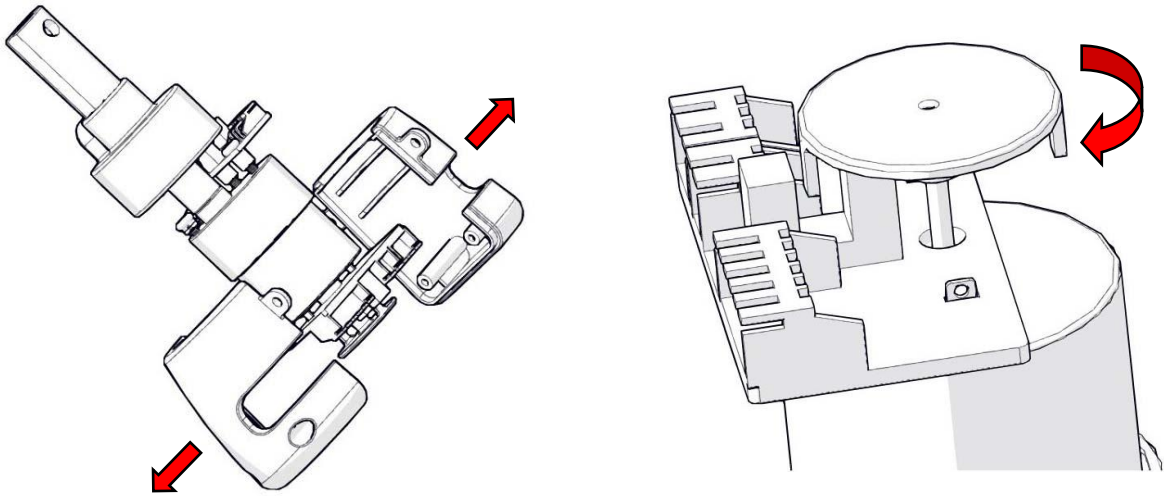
Check resistance motor bottom PC board to limit sensor 3pins wire both side plug well.
